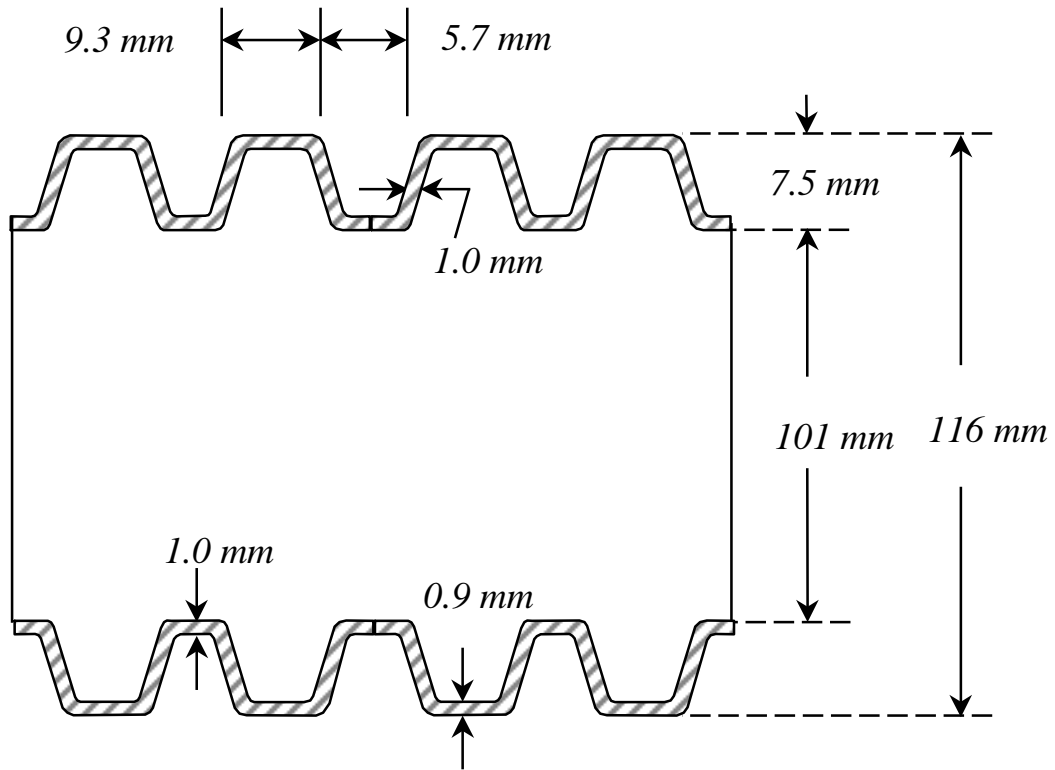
longitudinal cross-section and geometrical details of a 101mm I.D. tube
